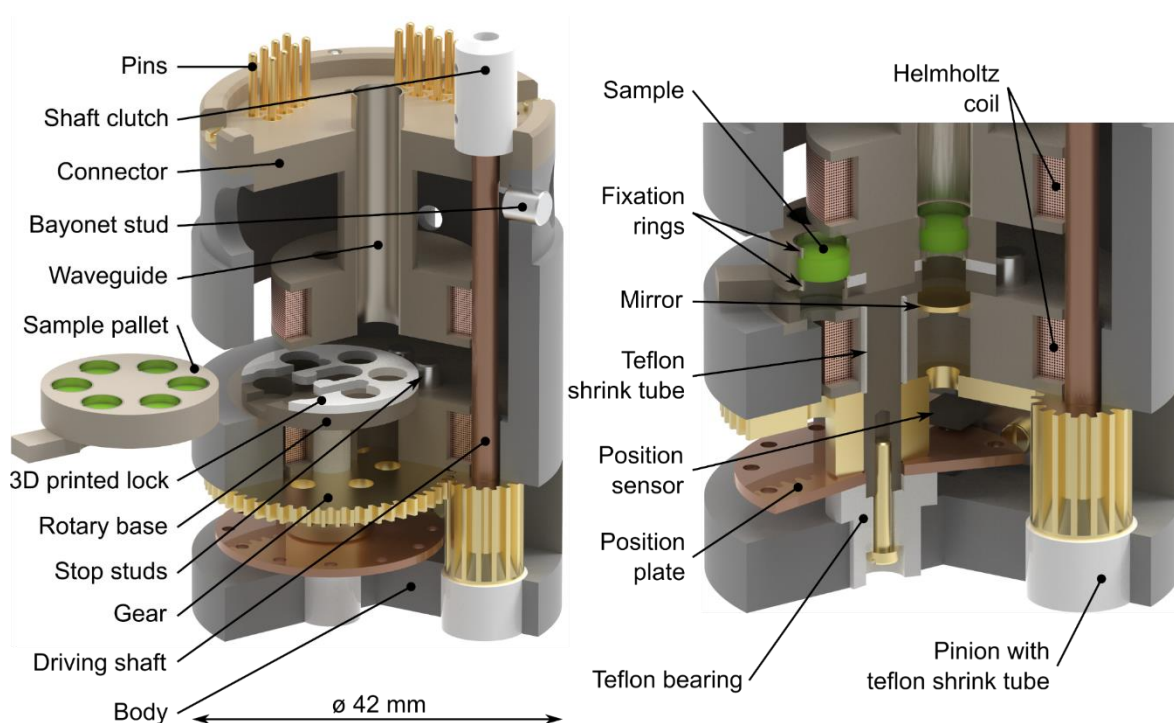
Design of carousel sample holder – sectional views containing annotations of all parts, the whole assembly (on the left), and the detailed view to the rotary system (on the right).
